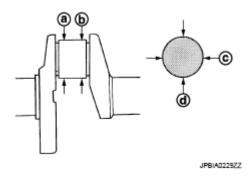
Measuring Outer Diameter Of Crankshaft Pin Journal Using Micrometer Courtesy of NISSAN MOTOR CO., U.S.A.
